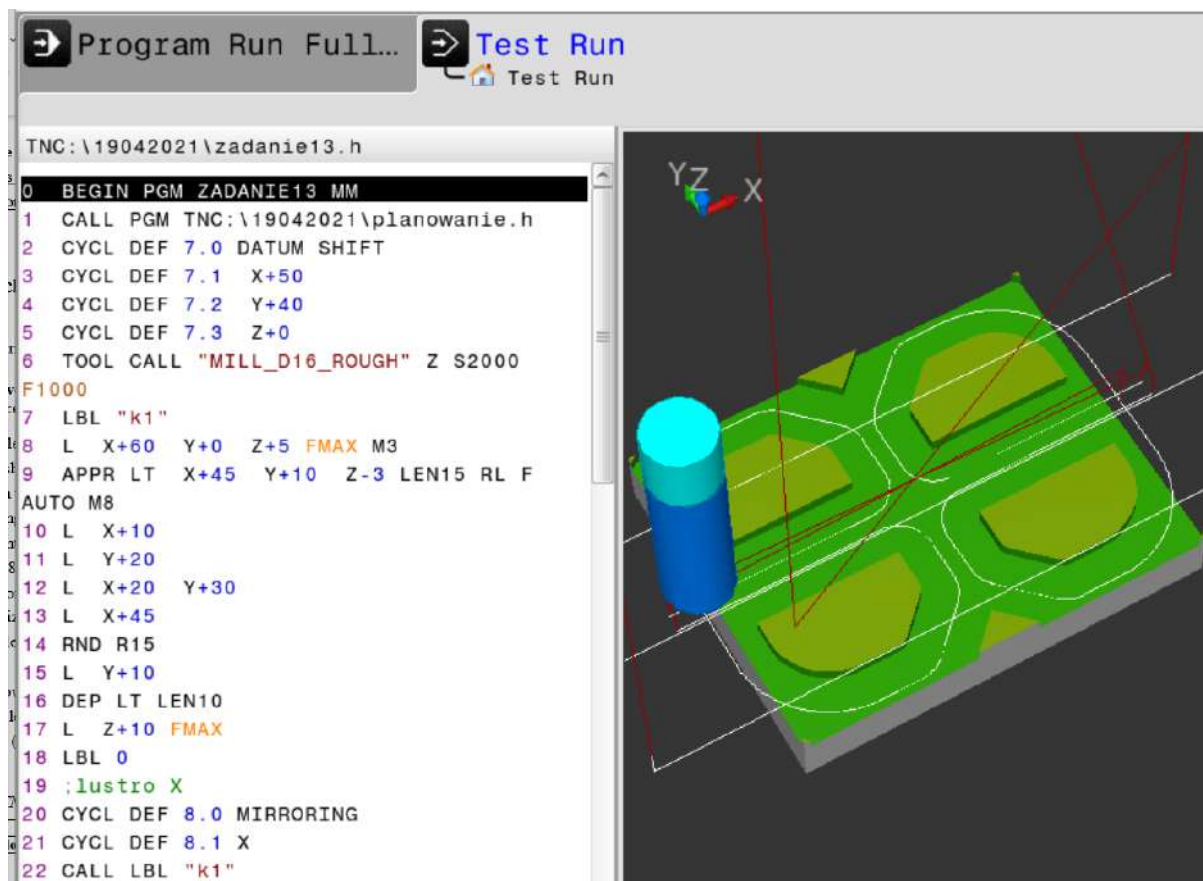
Example of 3D model workpiece simulation with toolpaths.
